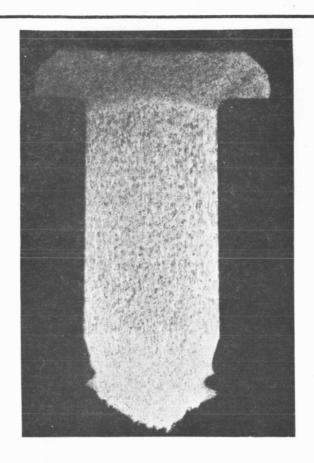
FRACTURE SURFACE, SPECIMENS 6 and 7, 8X
